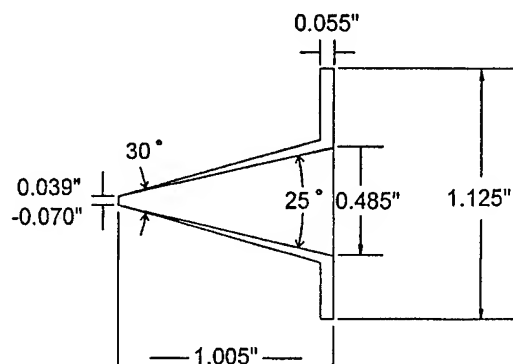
Cross-sectional drawing of the fabricated EDM graphite skimmers.
